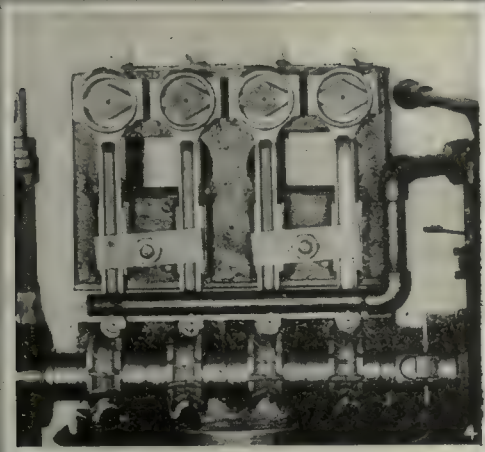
Rounding small end of rods on Cincinnati milling machine. Work located on studs through finished holes. Production time, 2 min. for 4 rods.
